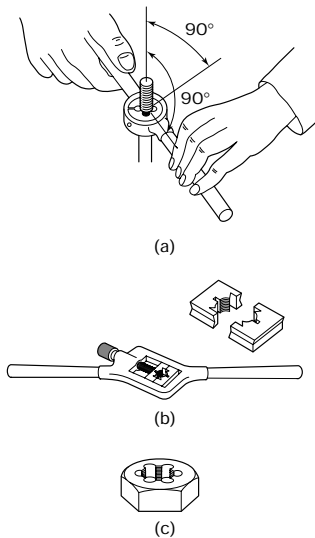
Screw thread dies: alignment and further types: (a) diestock must be aligned with the axis of the work; (b) rectangular split dies; (c) solid die nut
